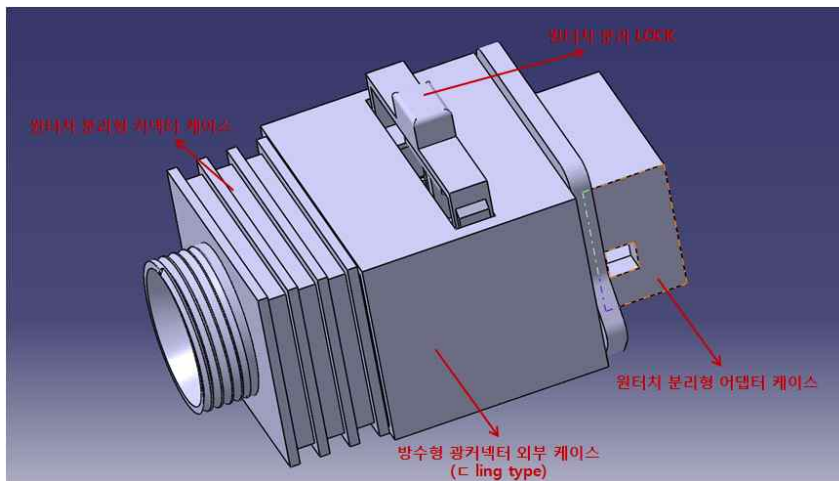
Design of inter-lock waterproof connector(Assemble)
